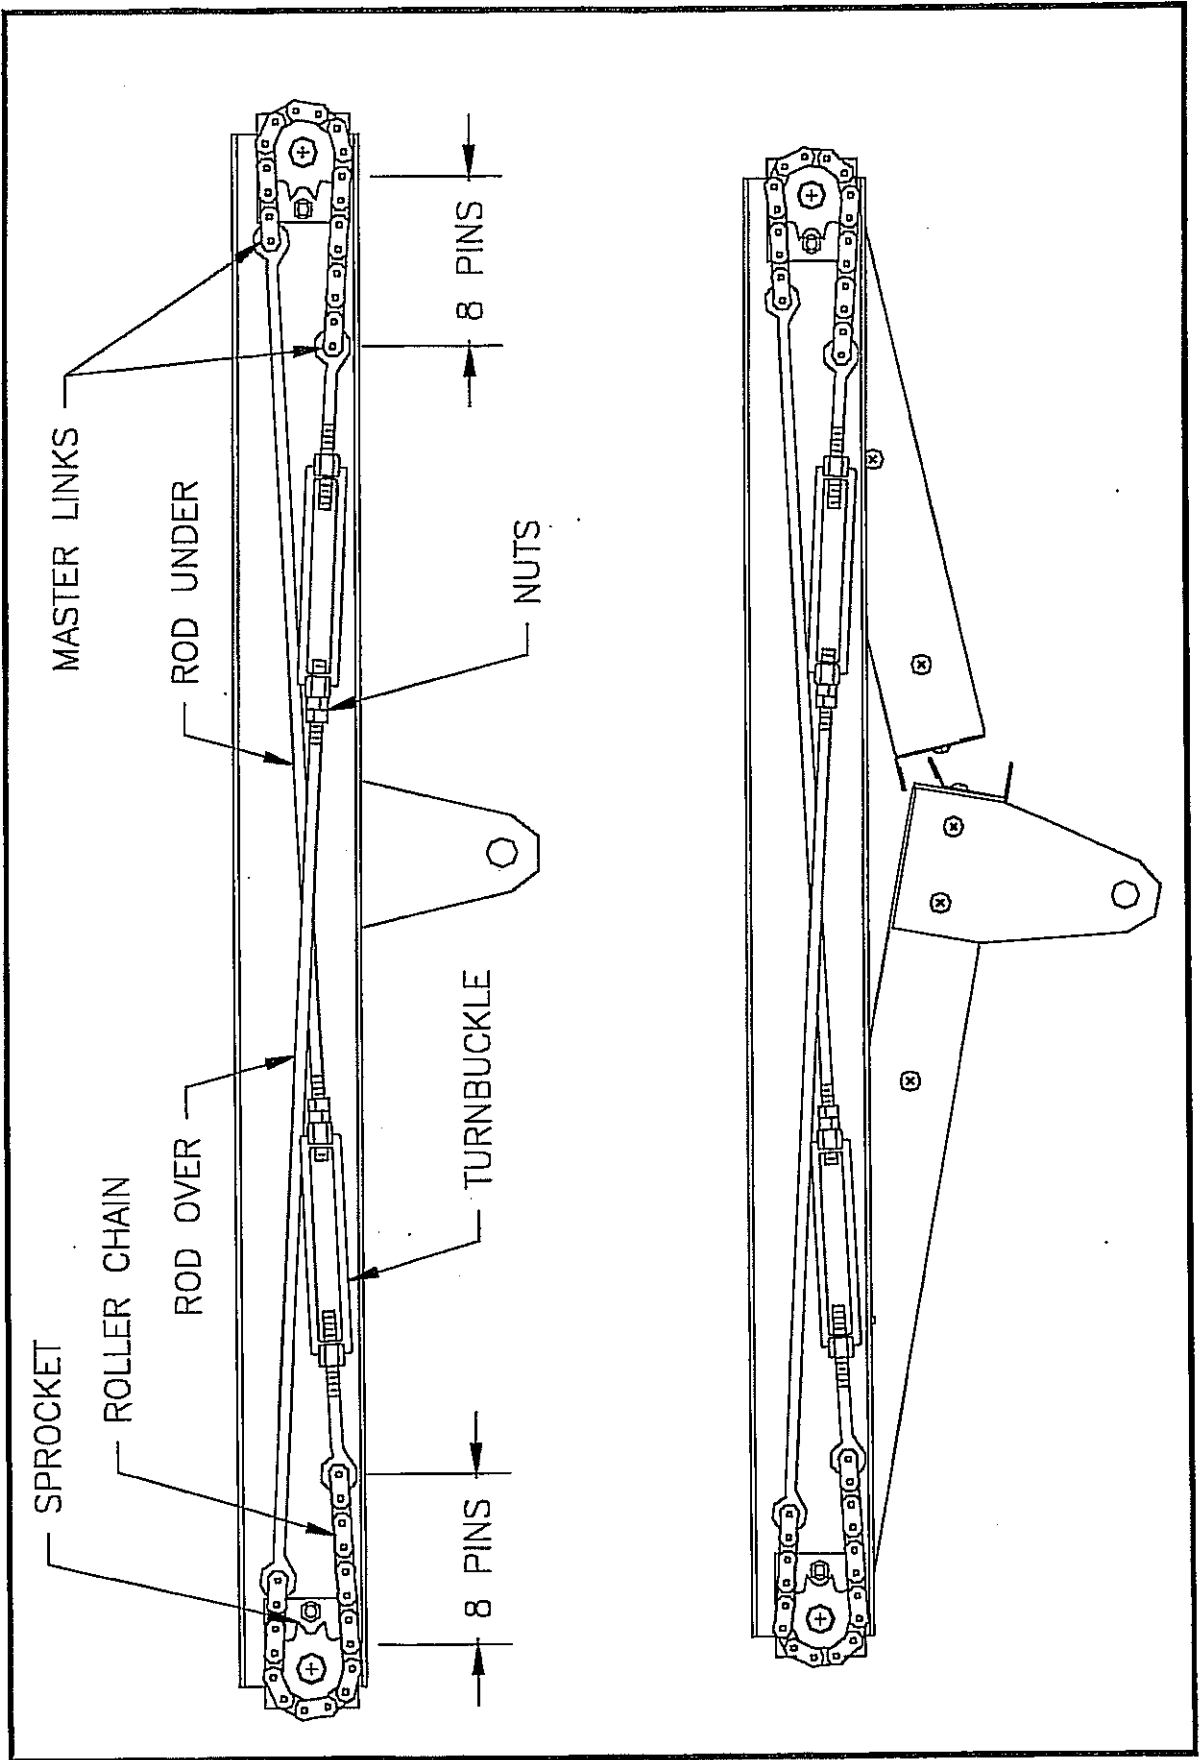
DOOR CHAIN/TURNBUCKLE ASSEMBLY
